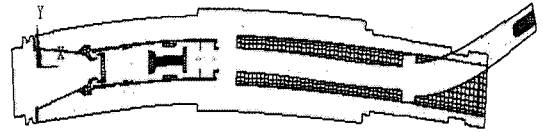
(d) 1st mode shape of the spindle and drawbar [783Hz]
